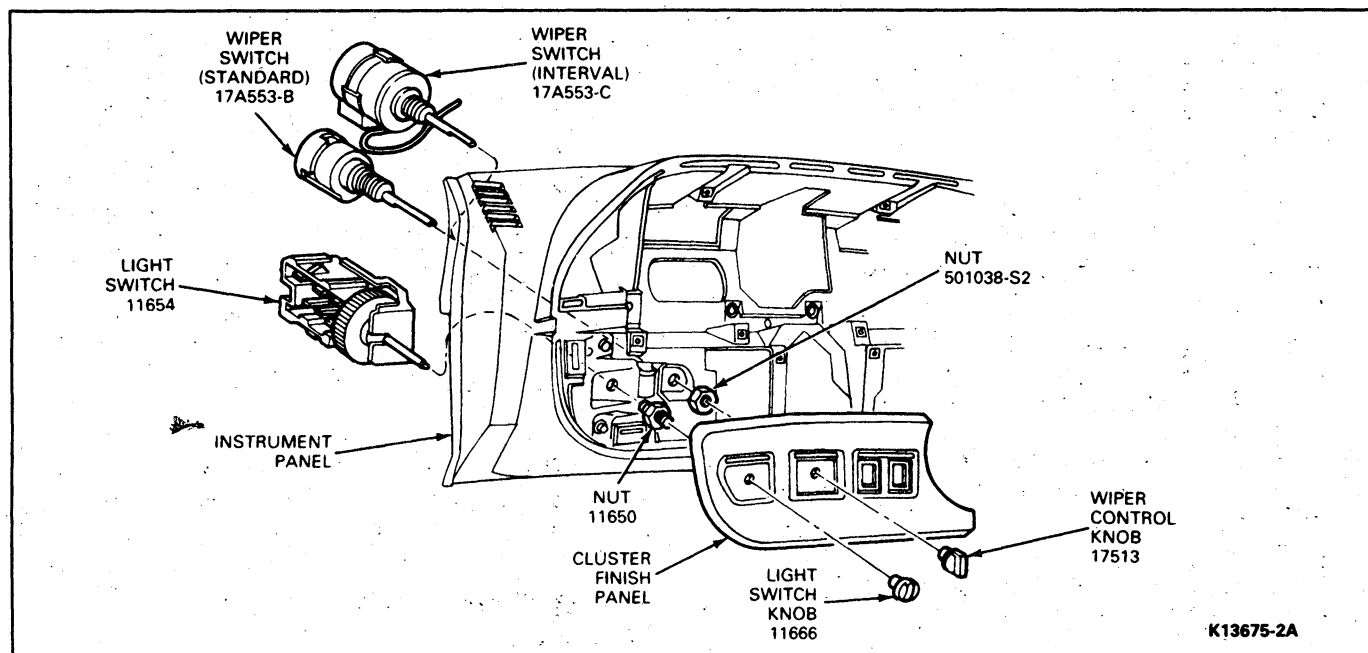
Wiper Control Switch—F-150—F-350, F-Super Duty and Bronco
